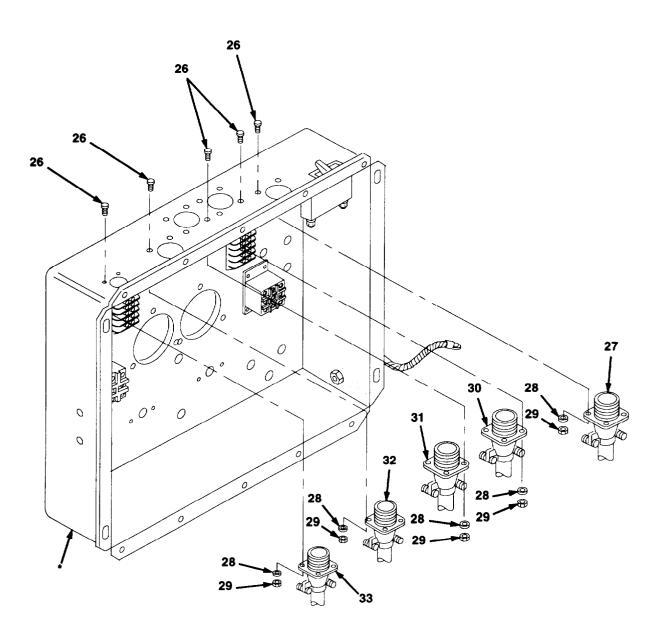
Control Panel Assembly and Panel Cover (Sheet 3 of 4)
